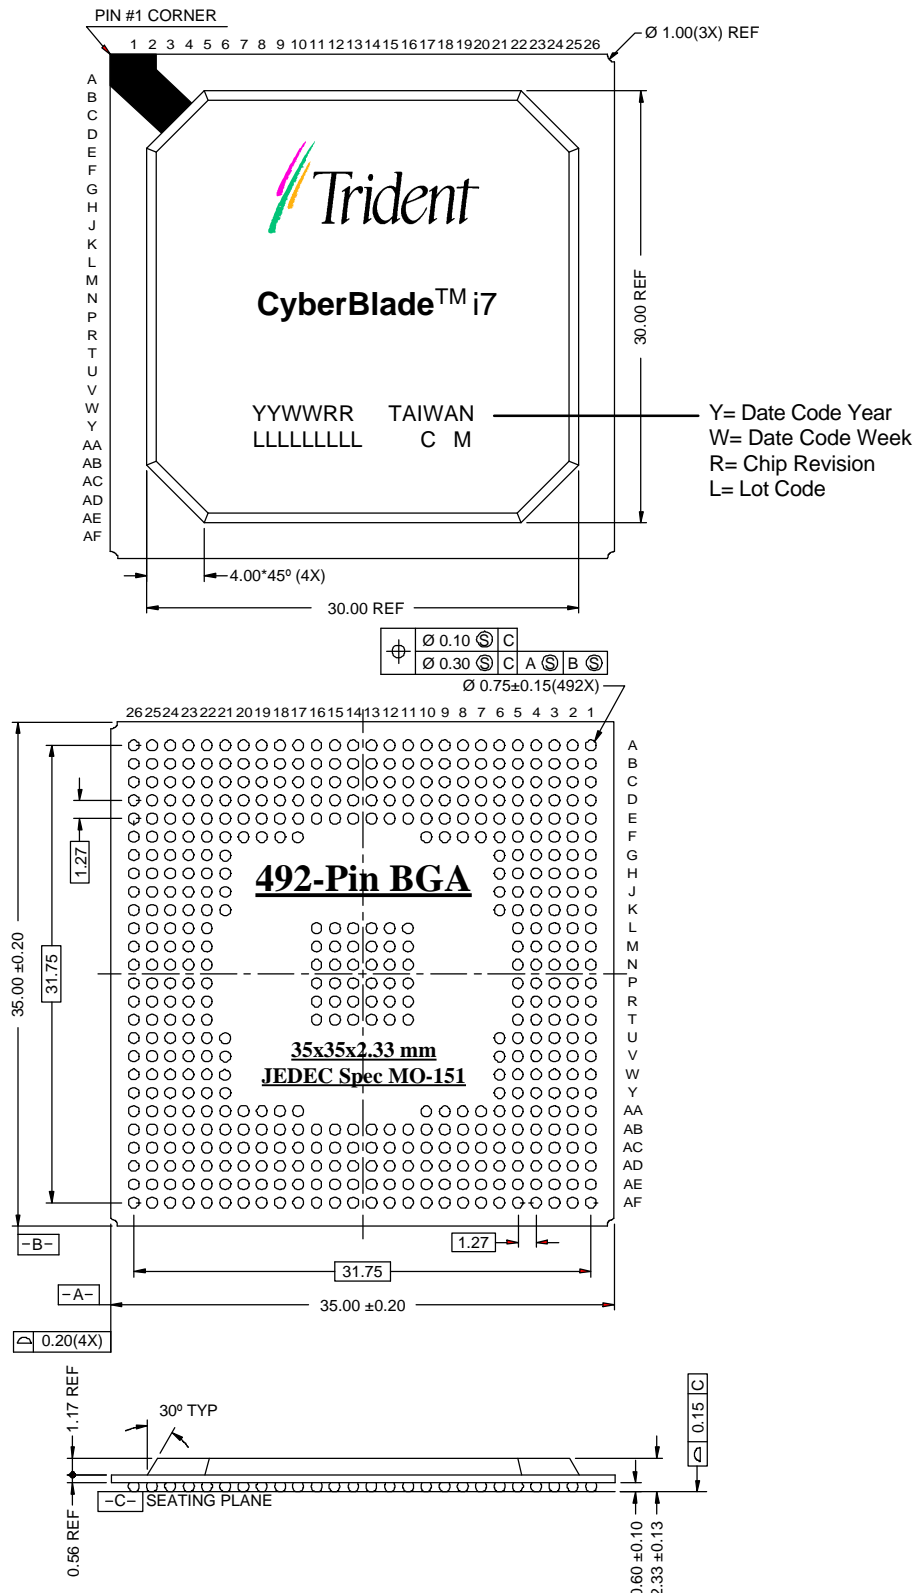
Mechanical Specifications - 492-Pin Ball Grid Array Package
